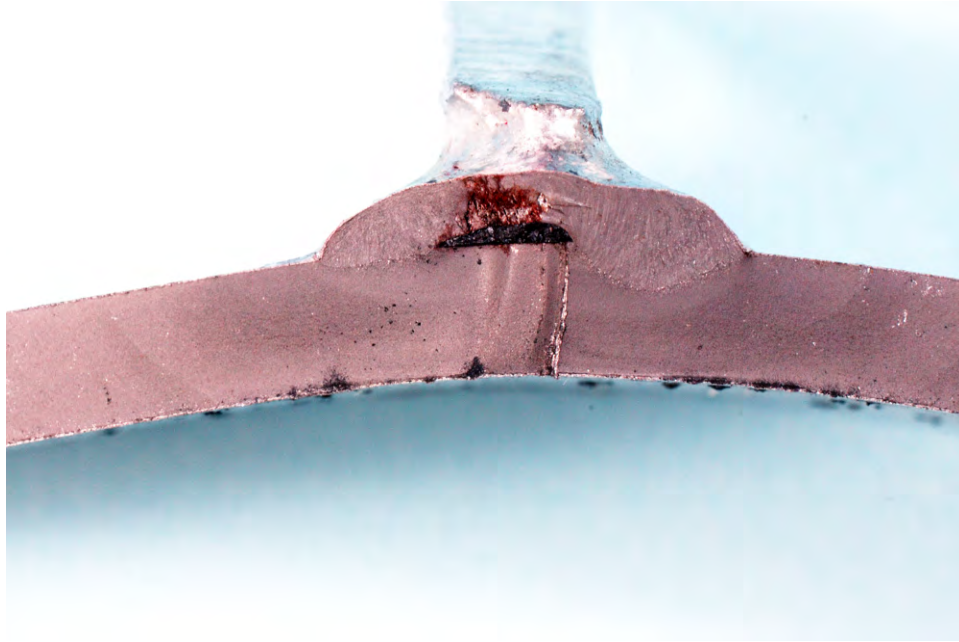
Fatigue crack growth from the lack of fusion at the stiffener to tube weld root in specimen XII-6
